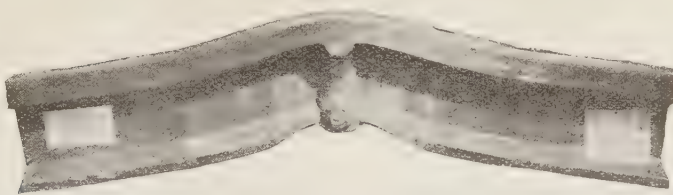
Thermit-fusion weld on standard French 55-kgr. (110.9 lb. per yd.) rails with the rail head hardened after rolling. The completed weld was heat-treated to restore in the rail head the hardened condition which the welding had destroyed.
